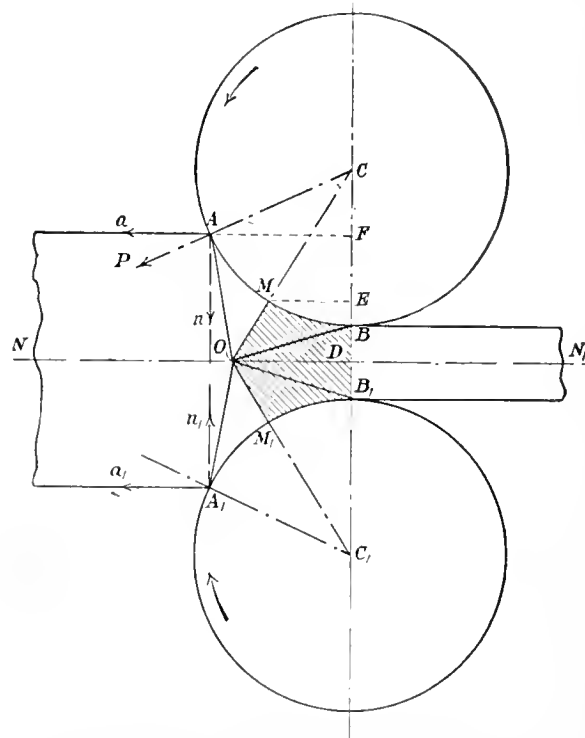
CROSS-SECTION OF A ROLLING MILL THROUGH THE ROLLS AND PIECE OF METAL BEING ROLLED
